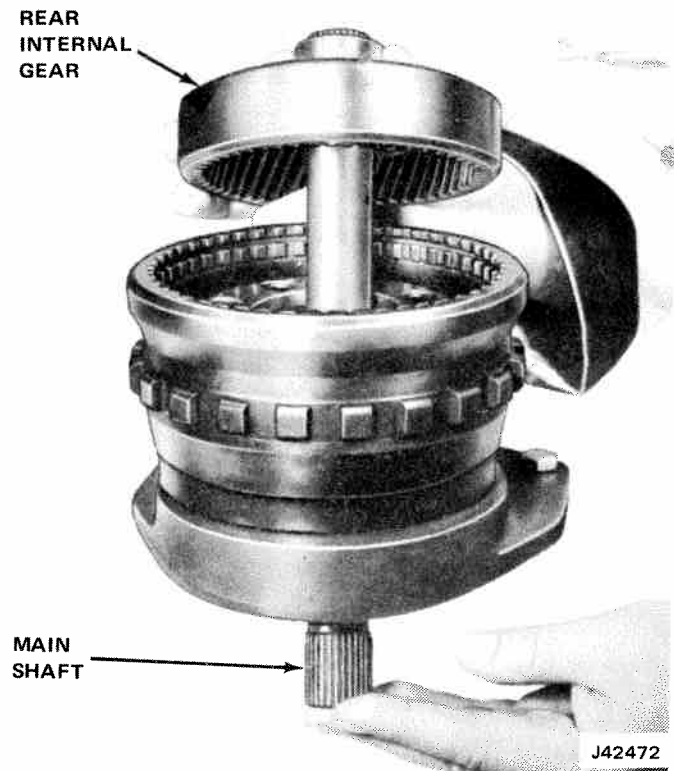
Removing Rear Internal Gear and Main Shaft From Output Carrier Assembly
